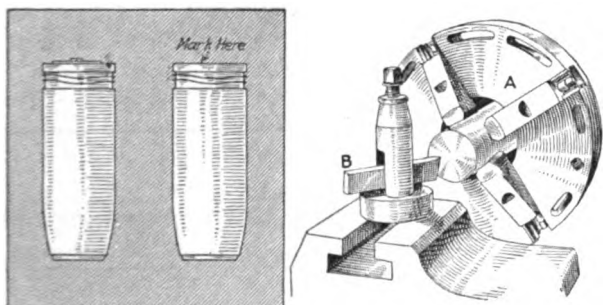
FACING BASE PLATE AND BASE IN ENGINE LATHE EQUIPPED WITH COMBINATION CHUCK
